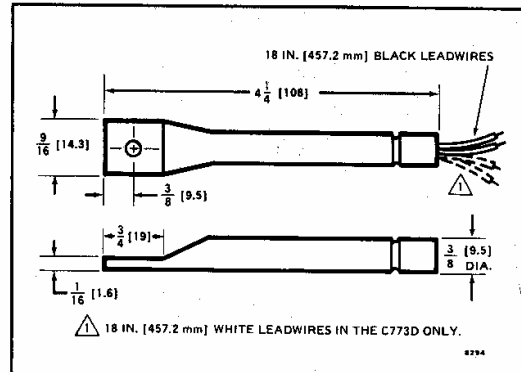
C773C,D DIMENSIONS IN INCHES [MILMETRES IN BRACKETS].
